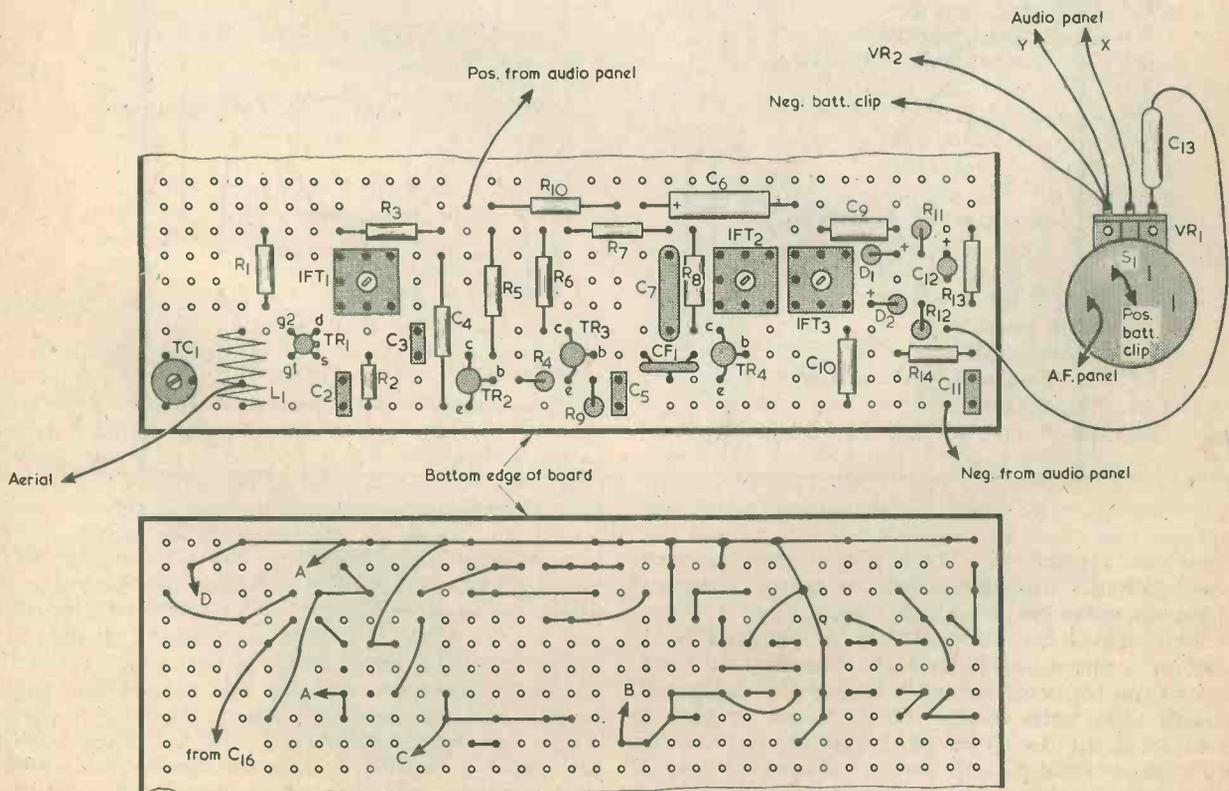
The mixer and i.f. amplifier wiring. The parts are assembled at the bottom of the main component board
